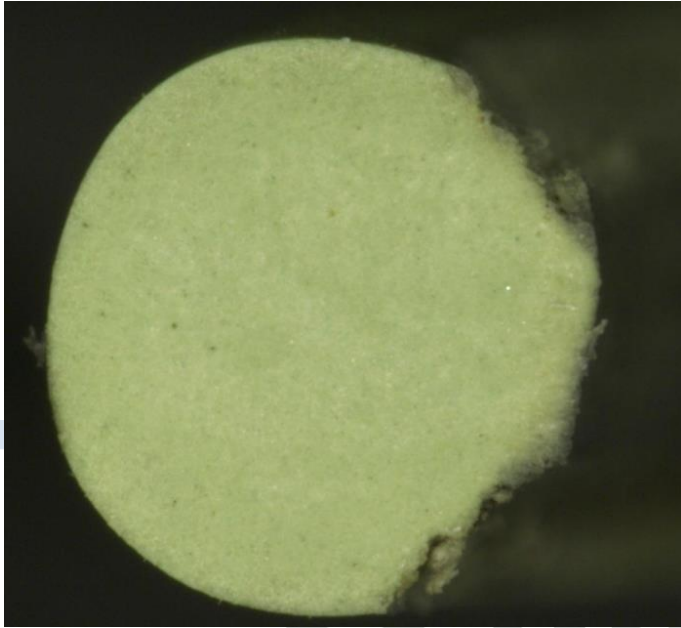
O-ring damaged by gap extrusion (NBR 70 ShA at a gap of 0.2 mm and a pressure of 200 bar) in cross-section: atypically and strongly formed due to a sharp groove edge
